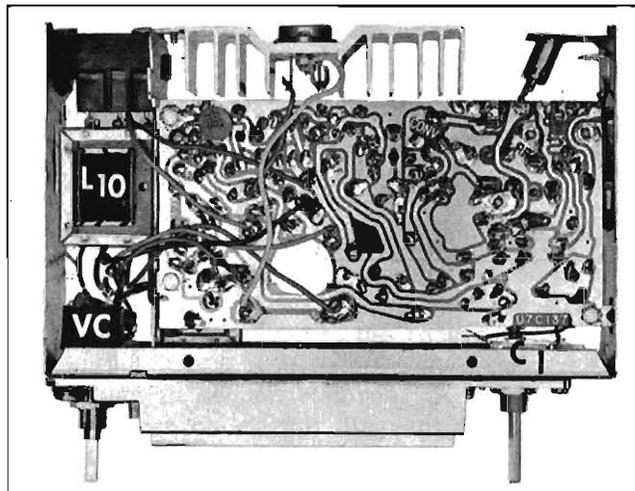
CHEVY II - PARTS LAYOUT CIRCUIT BOARD VIEW - 985957 - RADIO
